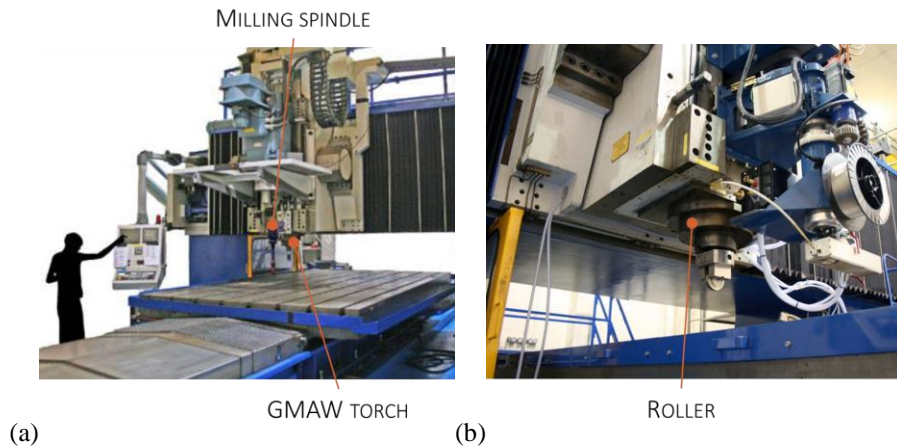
Hybrid WAAM-milling machine implemented at the Cranfield university: overall view of the machine (a) [15] and high pressure rolling system (b) [58].
